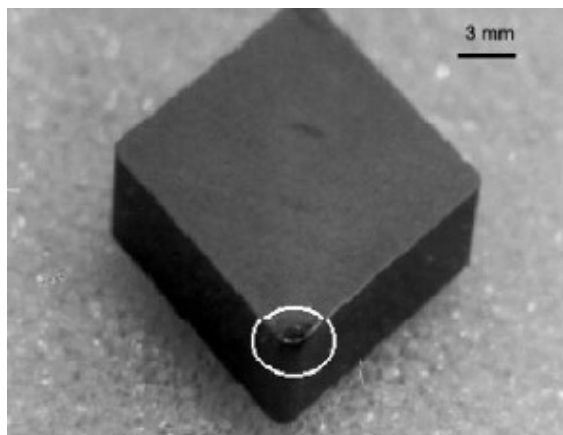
Presence of Crater wear on Alumina-SiC cutting tool [21]
